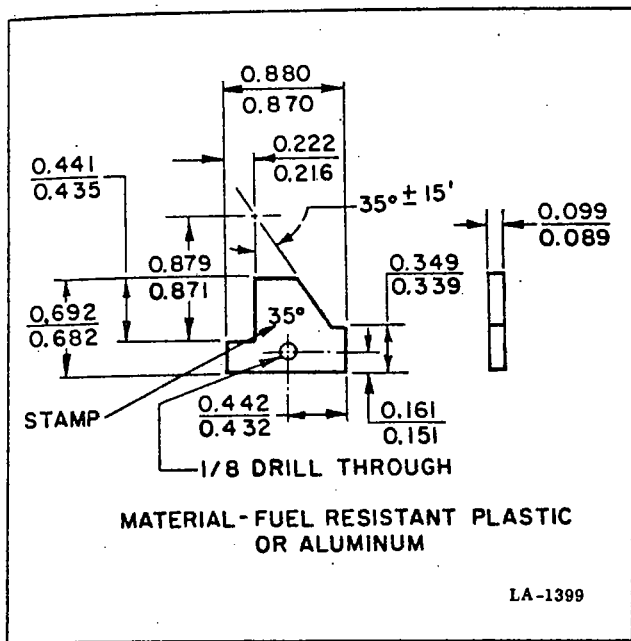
Dimensions for Manufacturing the T25939 Gage
